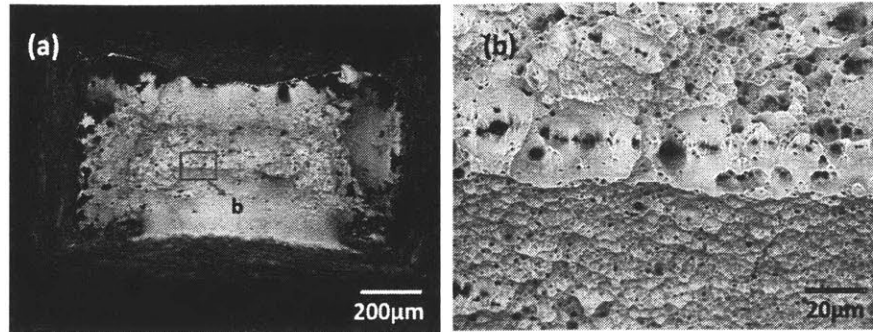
Failure surfaces of a DMLS-printed SS 316L uniaxial tensile test specimen: (a) apparent necking; (b) dimples can be seen, indicating ductile fracture.
